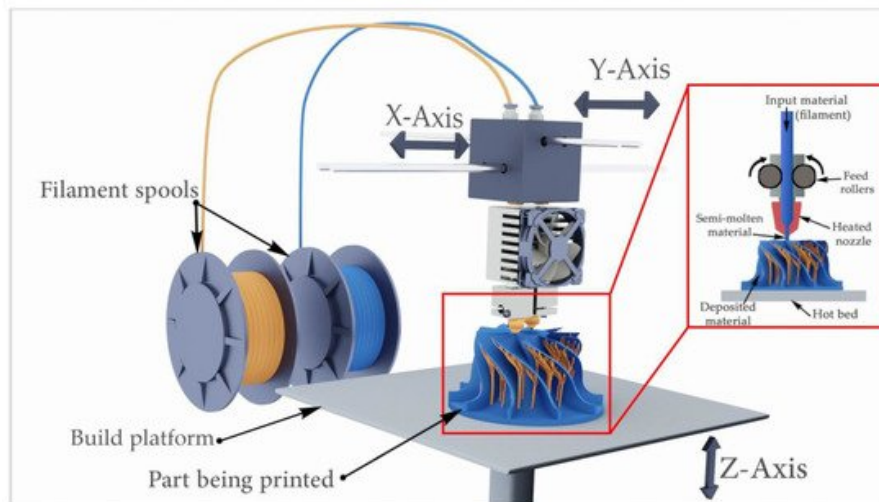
Drawing of the main components of a FDM 3D printer [26][27]
